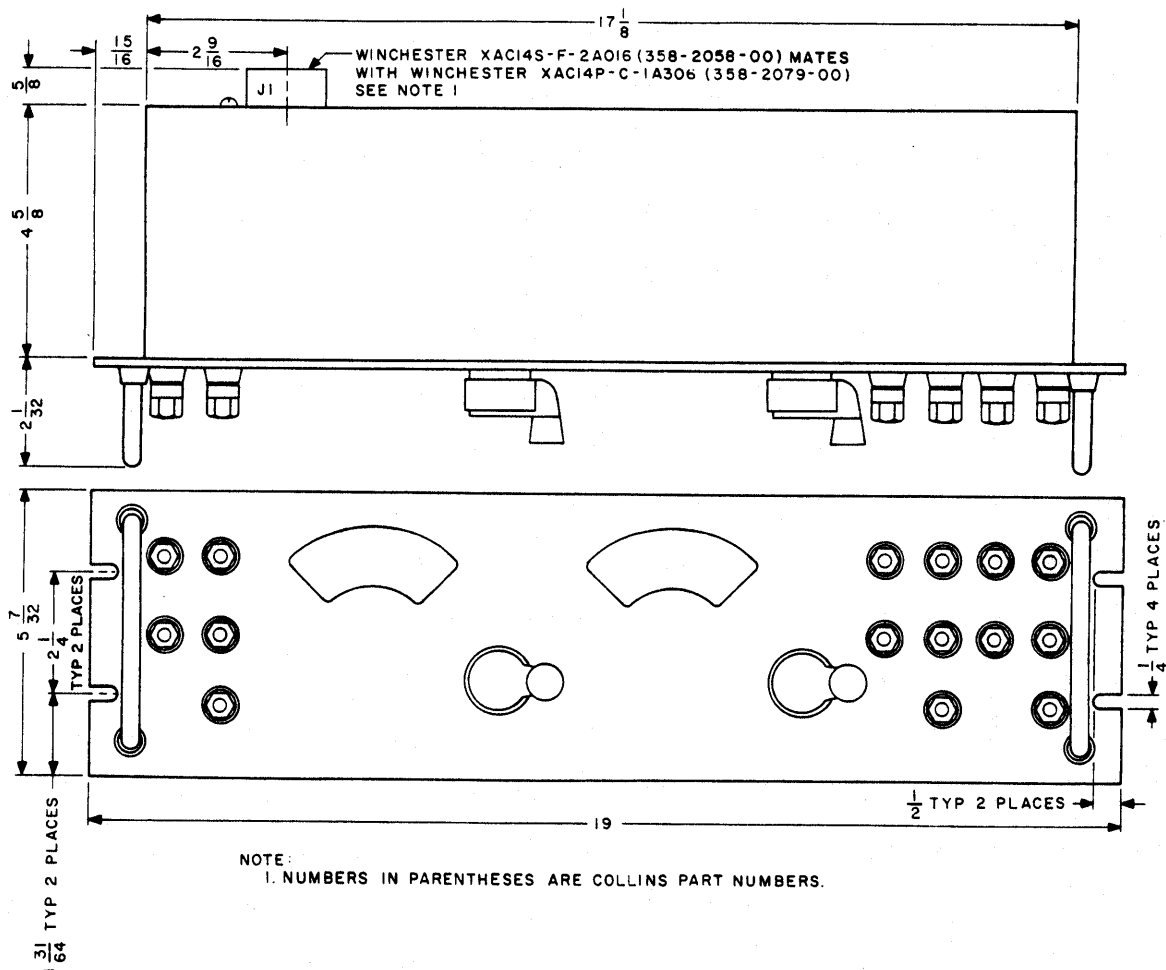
978F-2S Synchro Simulator, Outline and Mounting Dimensions
